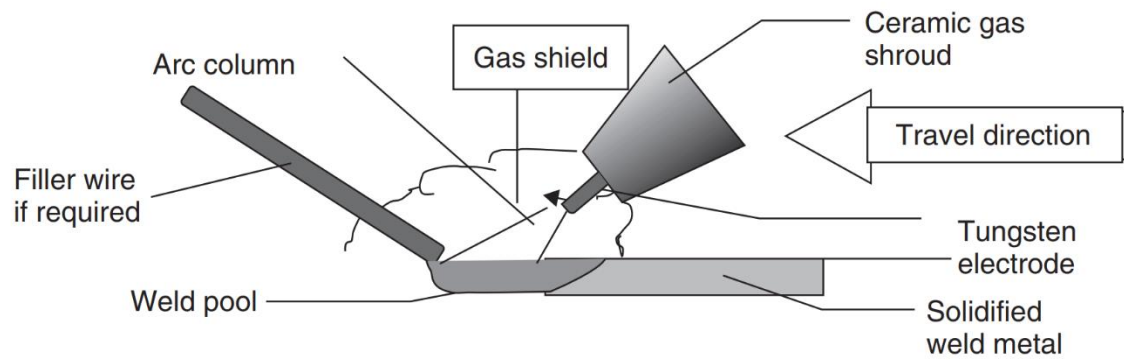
Gas Tungsten Arc Welding process (Mathers 2002)
